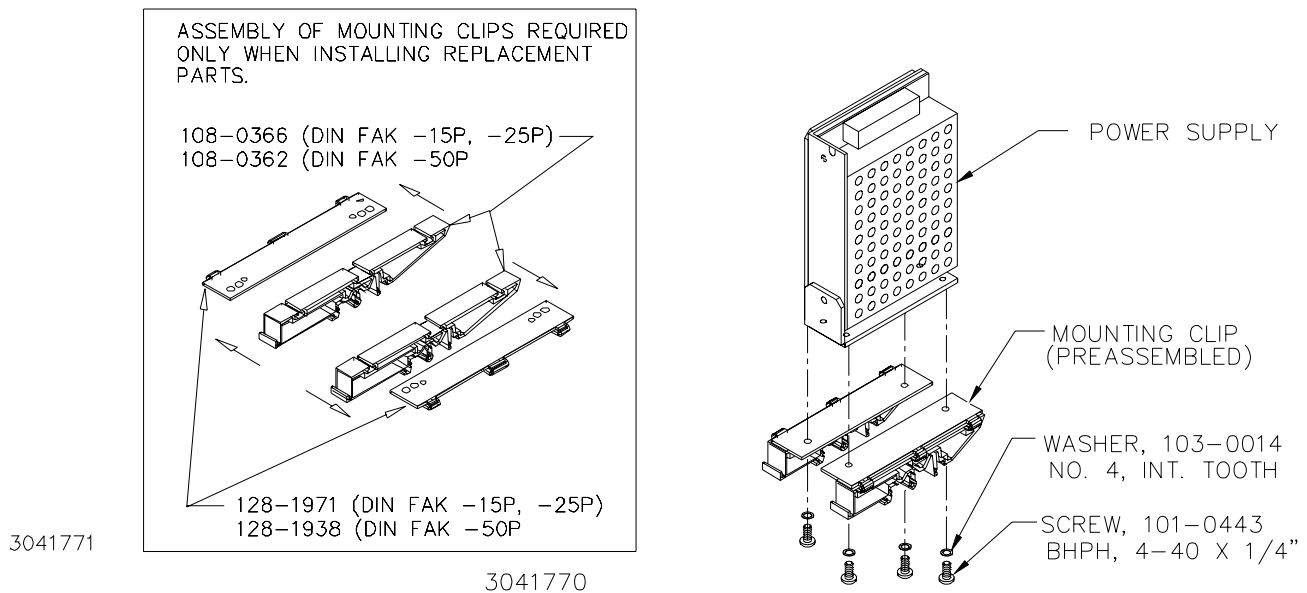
INSTALLING CLIPS ON MOUNTING BRACKET
